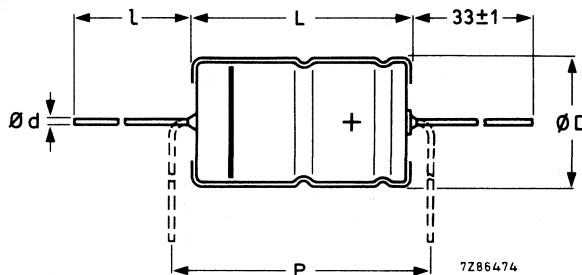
Style 1; see Table 3 for dimensions ϕd , ϕD , L, l and P.
